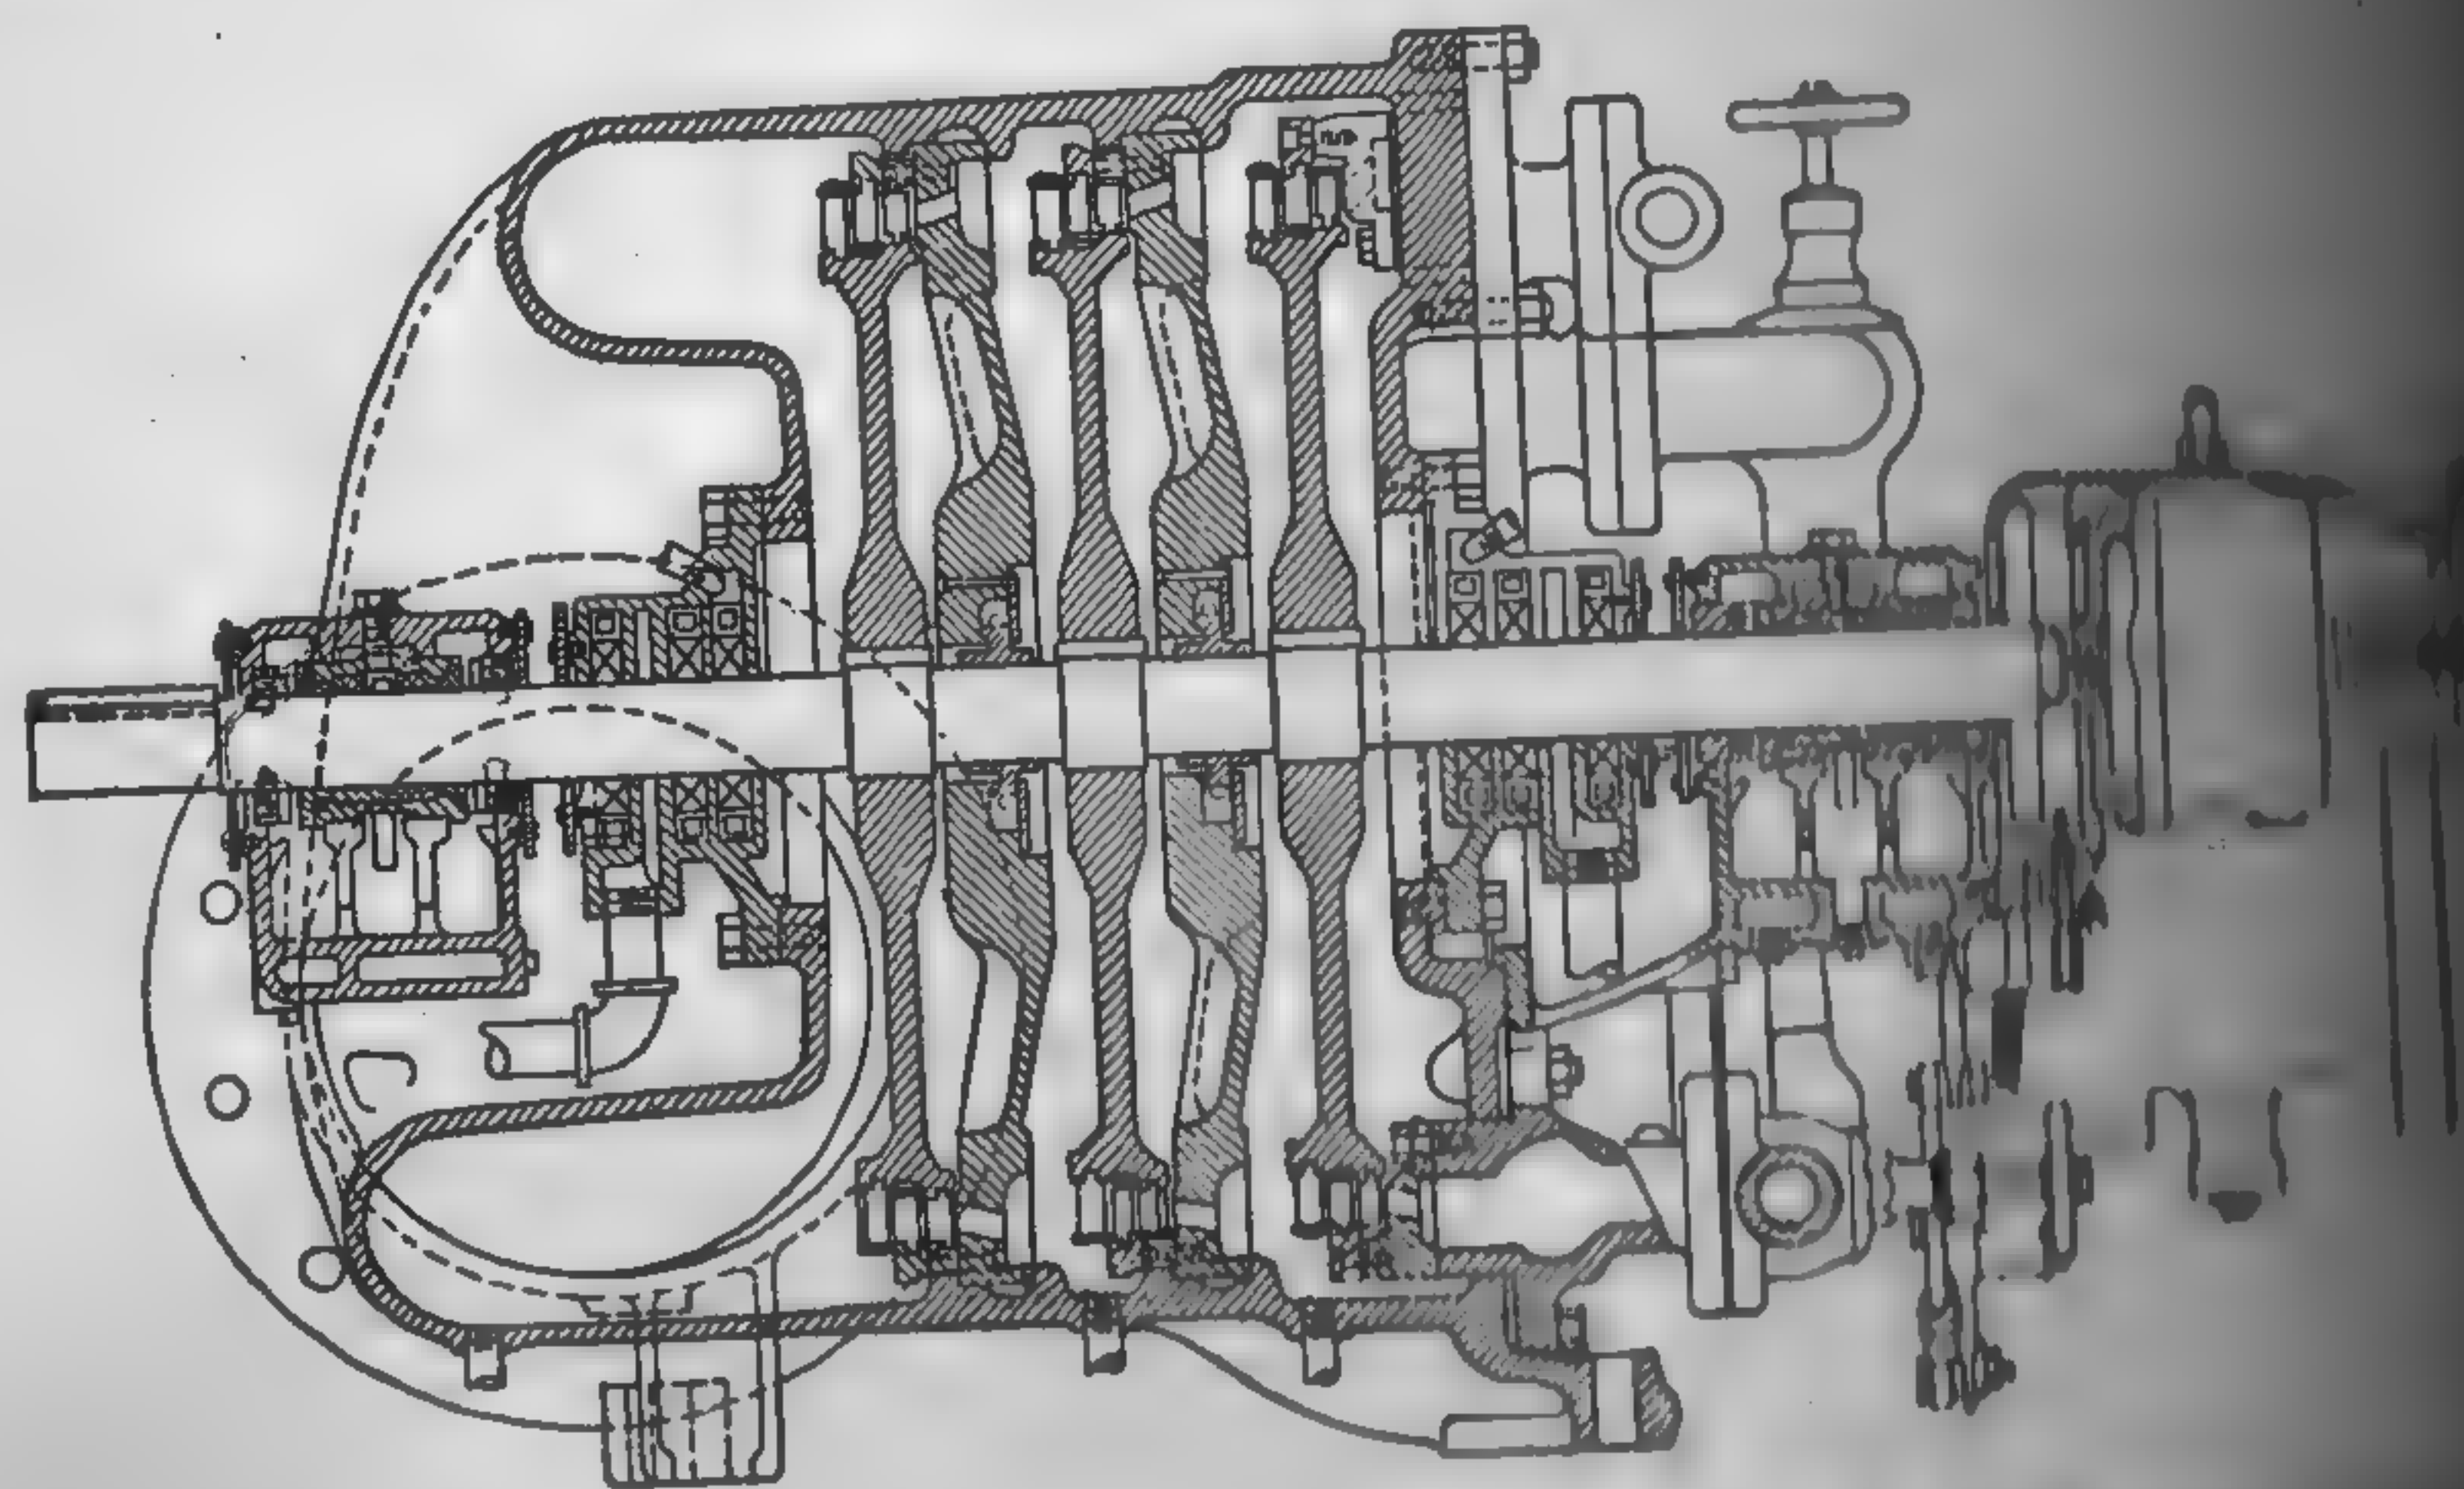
Assembly of Three-stage Curtis Turbine for Mechanical Drive.
